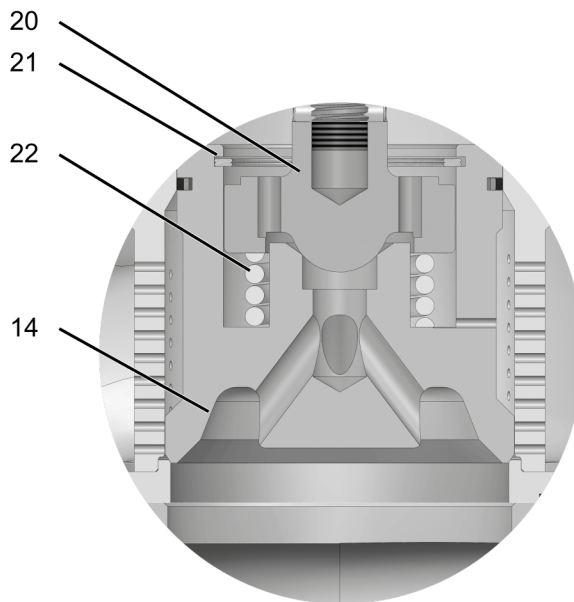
Version MIL 41400 - detailed view of pilot plug
